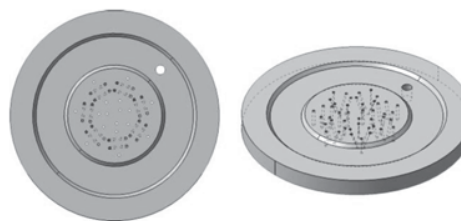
Top and isometric sketches of fixed-injector plate, [4]
